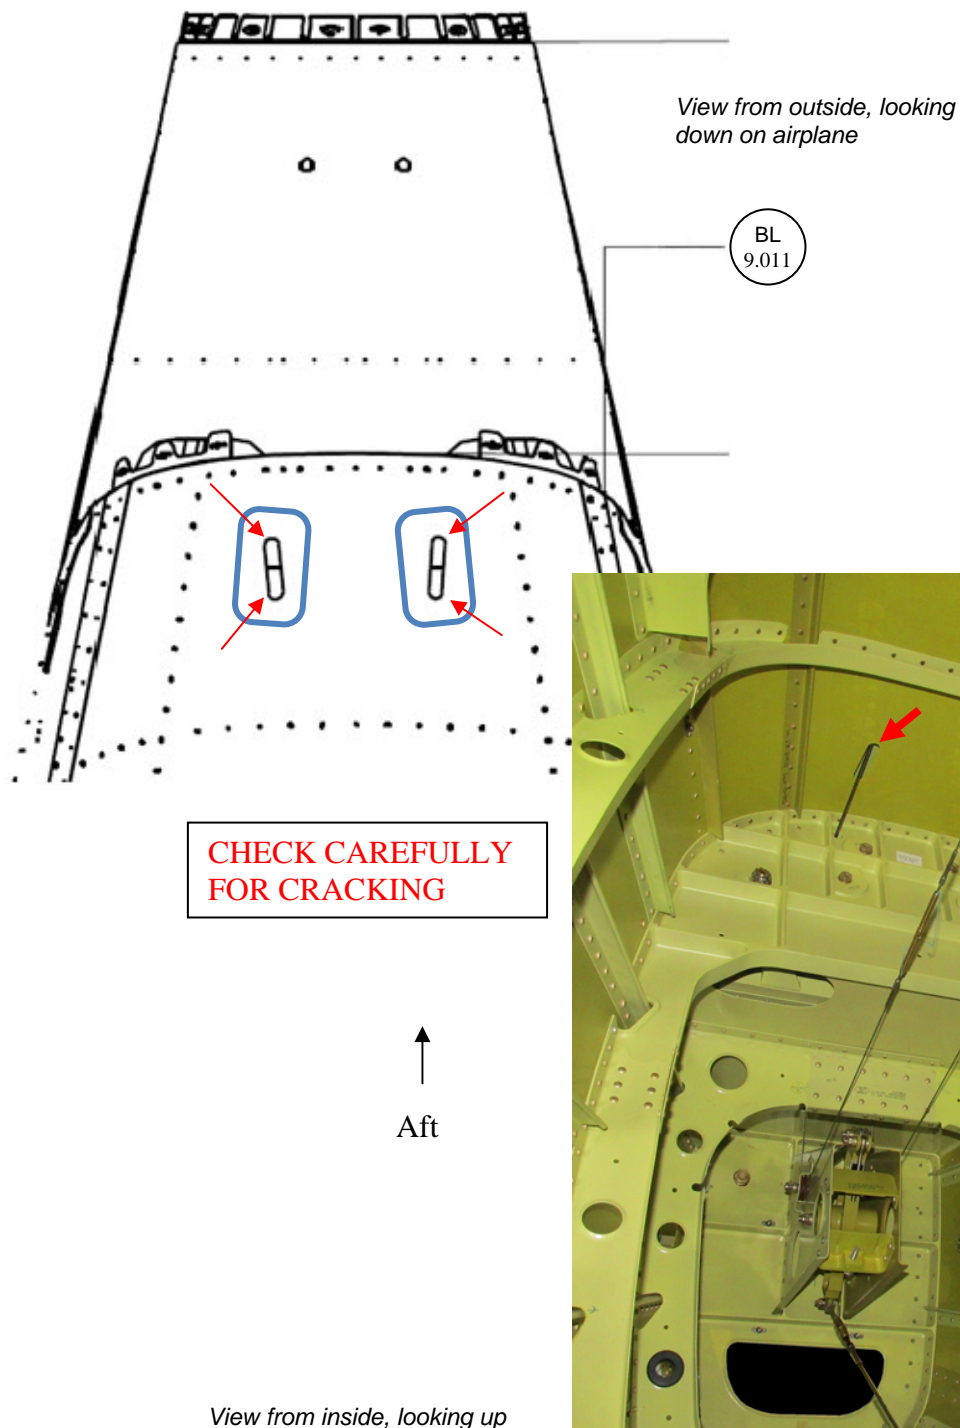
Rudder Cable Pass-Through Hole Perimeter Crack Check
